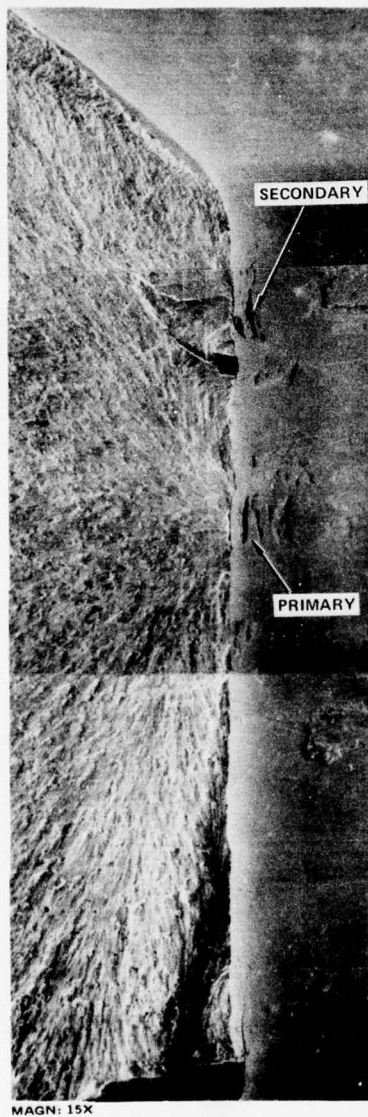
PRIMARY AND SECONDARY CRACKS INITIATING FROM HOLE DEFECTS ON FORWARD SIDE OF HOLE SHOWN IN FIGURE 41. SURFACE FINISH OF HOLE MEASURED 250 RHR.
